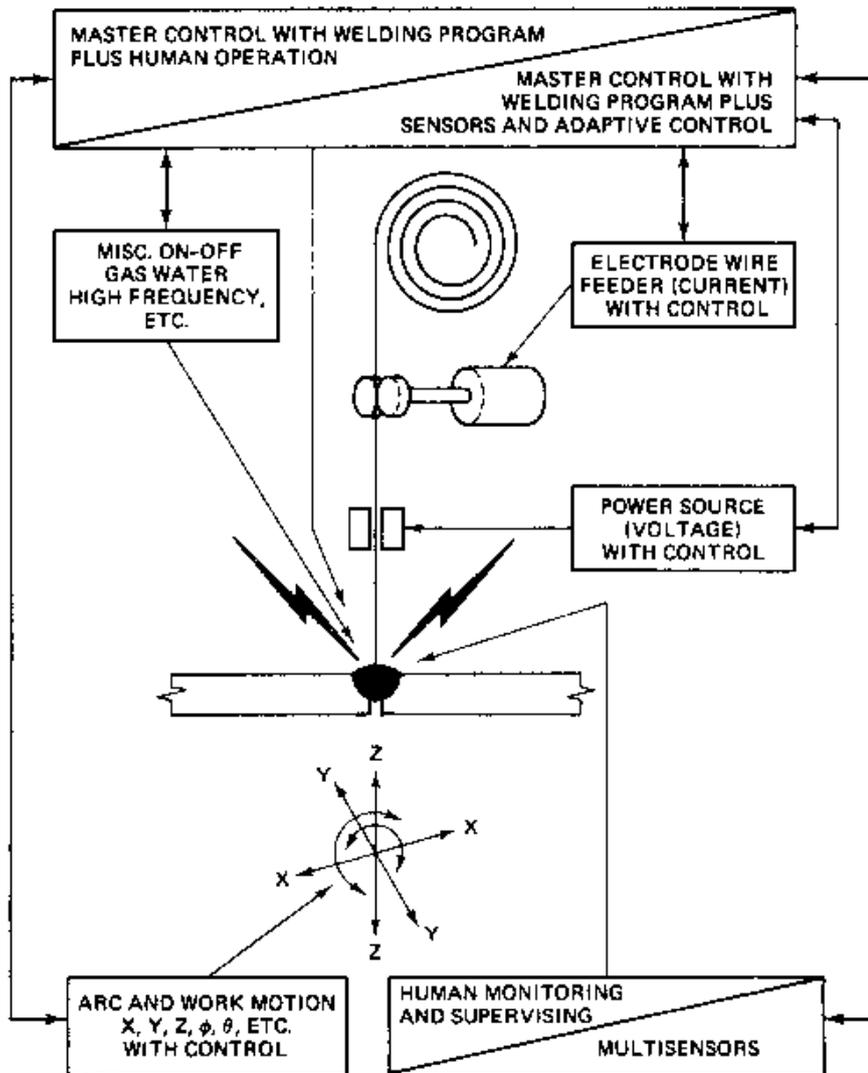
Automatic-adaptive control arc welding systems (Cary, p.291)
